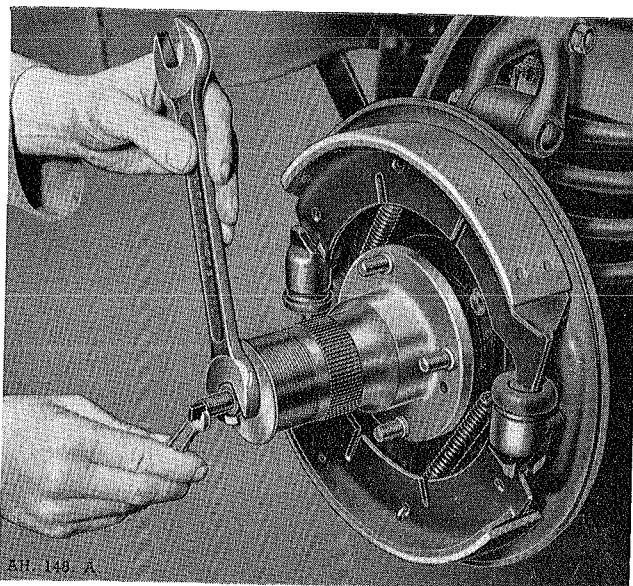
Using the special extractor to remove the grease retaining cup.
